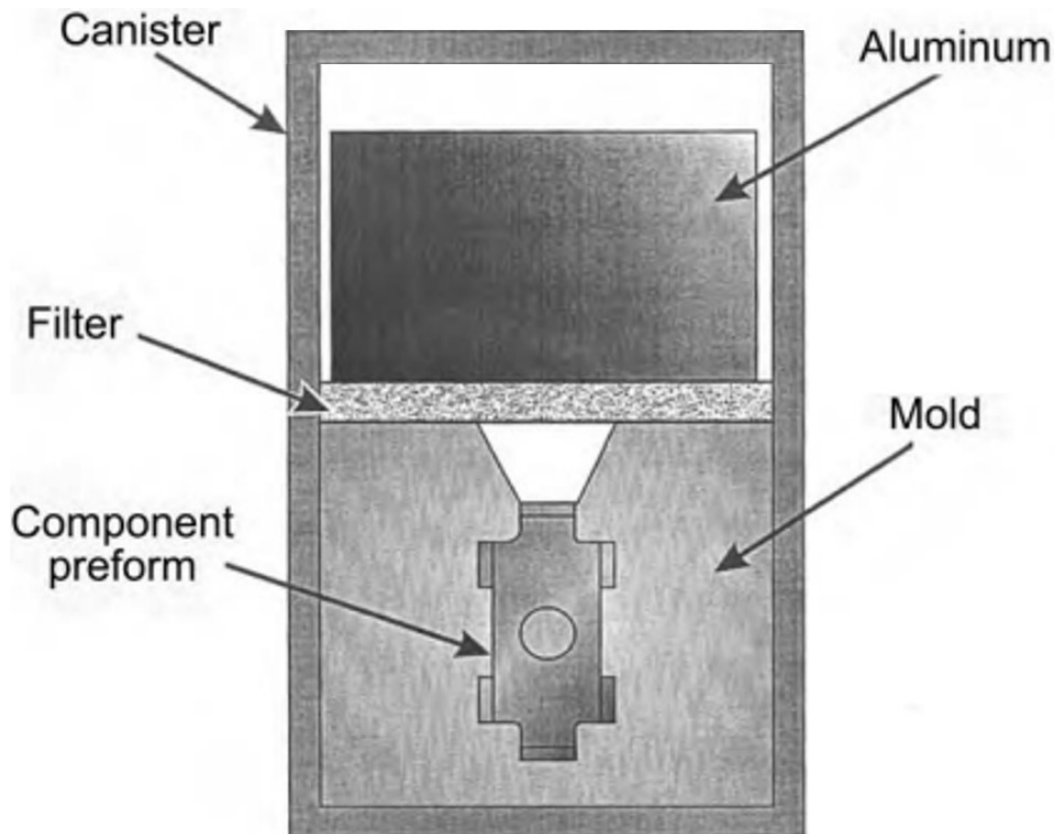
Top-fill pressure infiltration casting assembly scheme. Adapted from [43].
